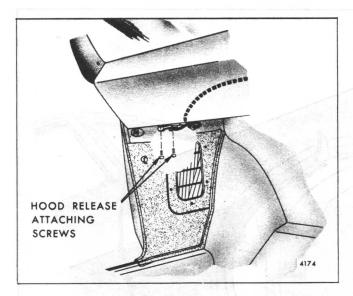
Hood Latch Release Assembly Attachment - "H" Body (Less "07, 27 Style)
